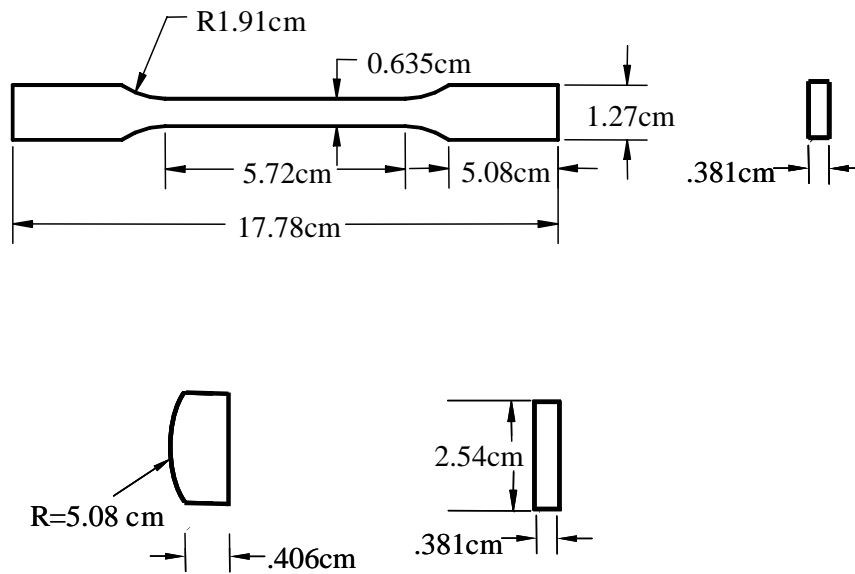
Drawing of Specimen and Fretting Pad with Dimensions
